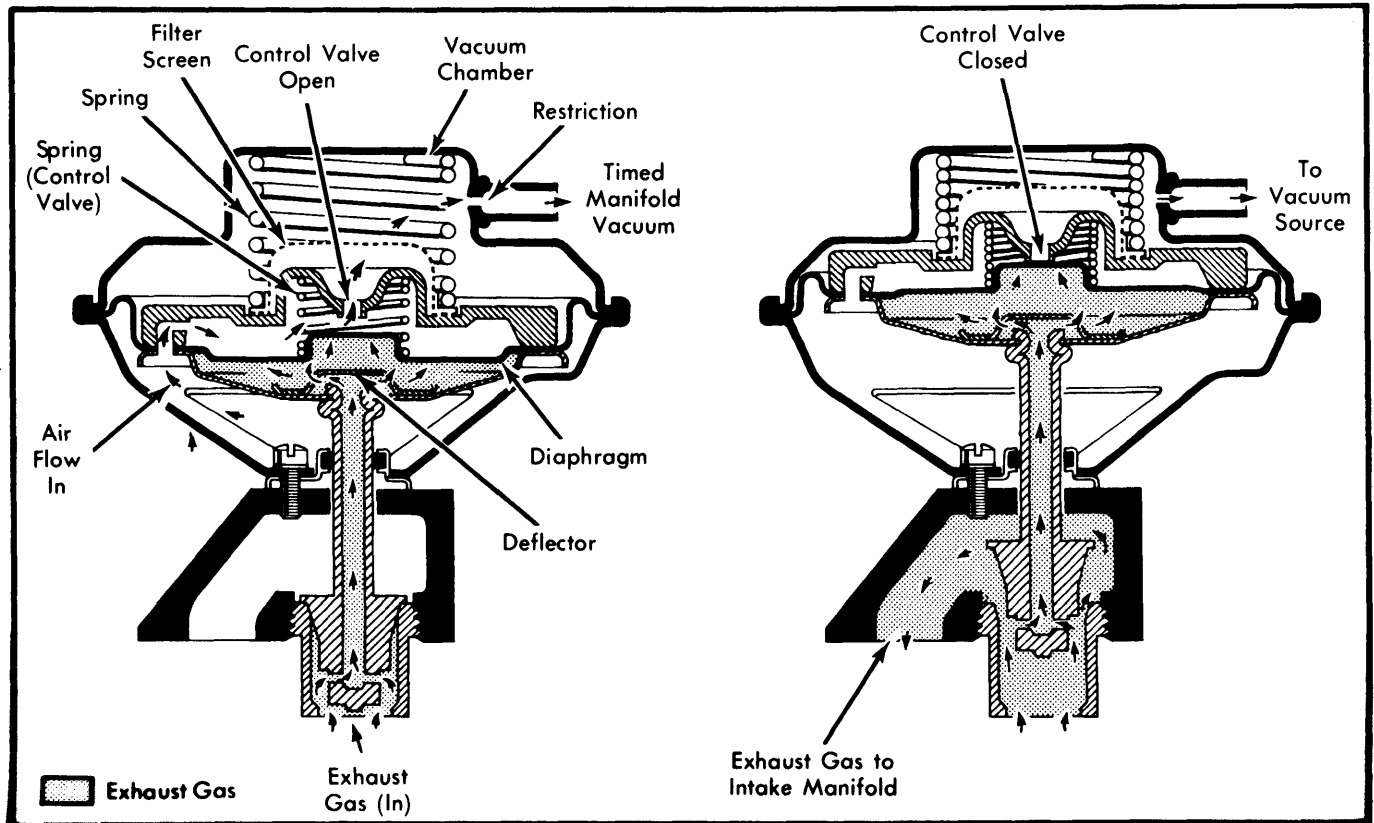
Cutaway View of Positive Back Pressure EGR Valve
